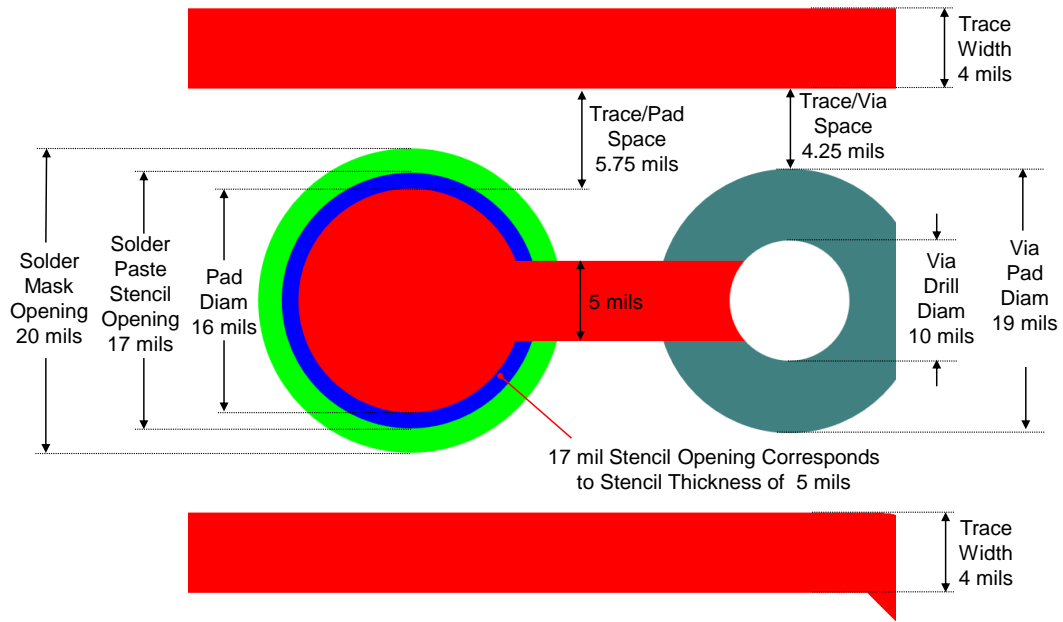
PRP Package Footprint Example 2 – 4-mil Trace and 10-mil Via Drill Hole
